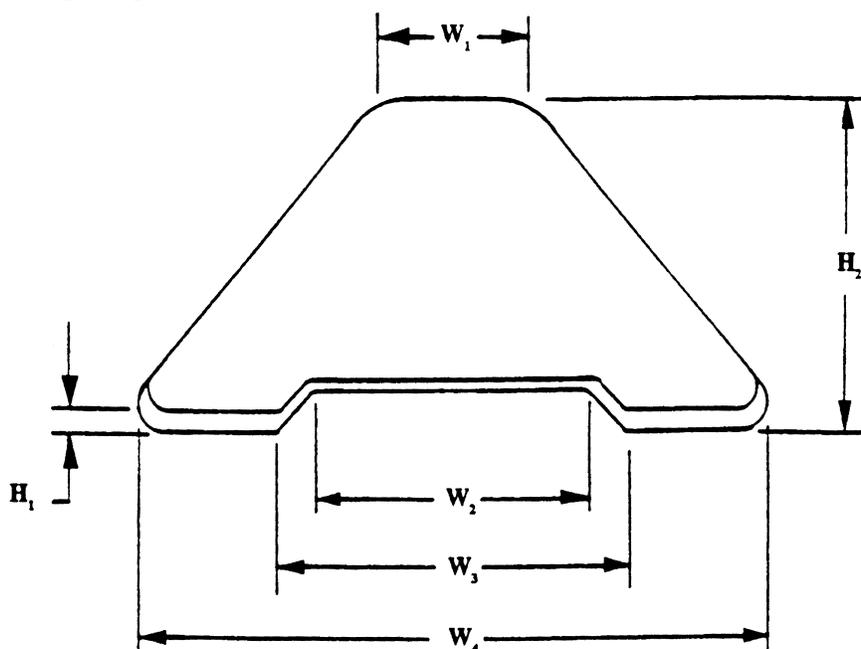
Track Shoe Pad Dimensions (footprint data)
